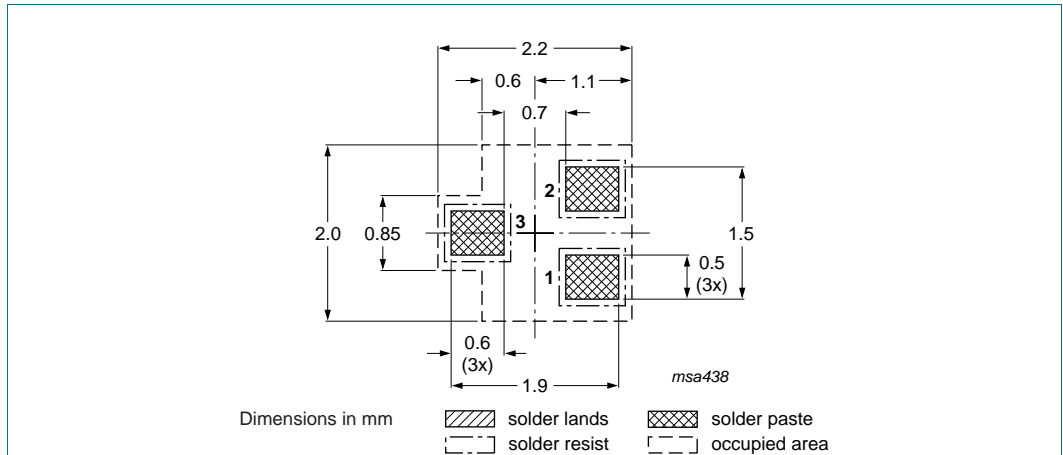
Reflow soldering footprint BAV70T (SOT416/SC-75)
